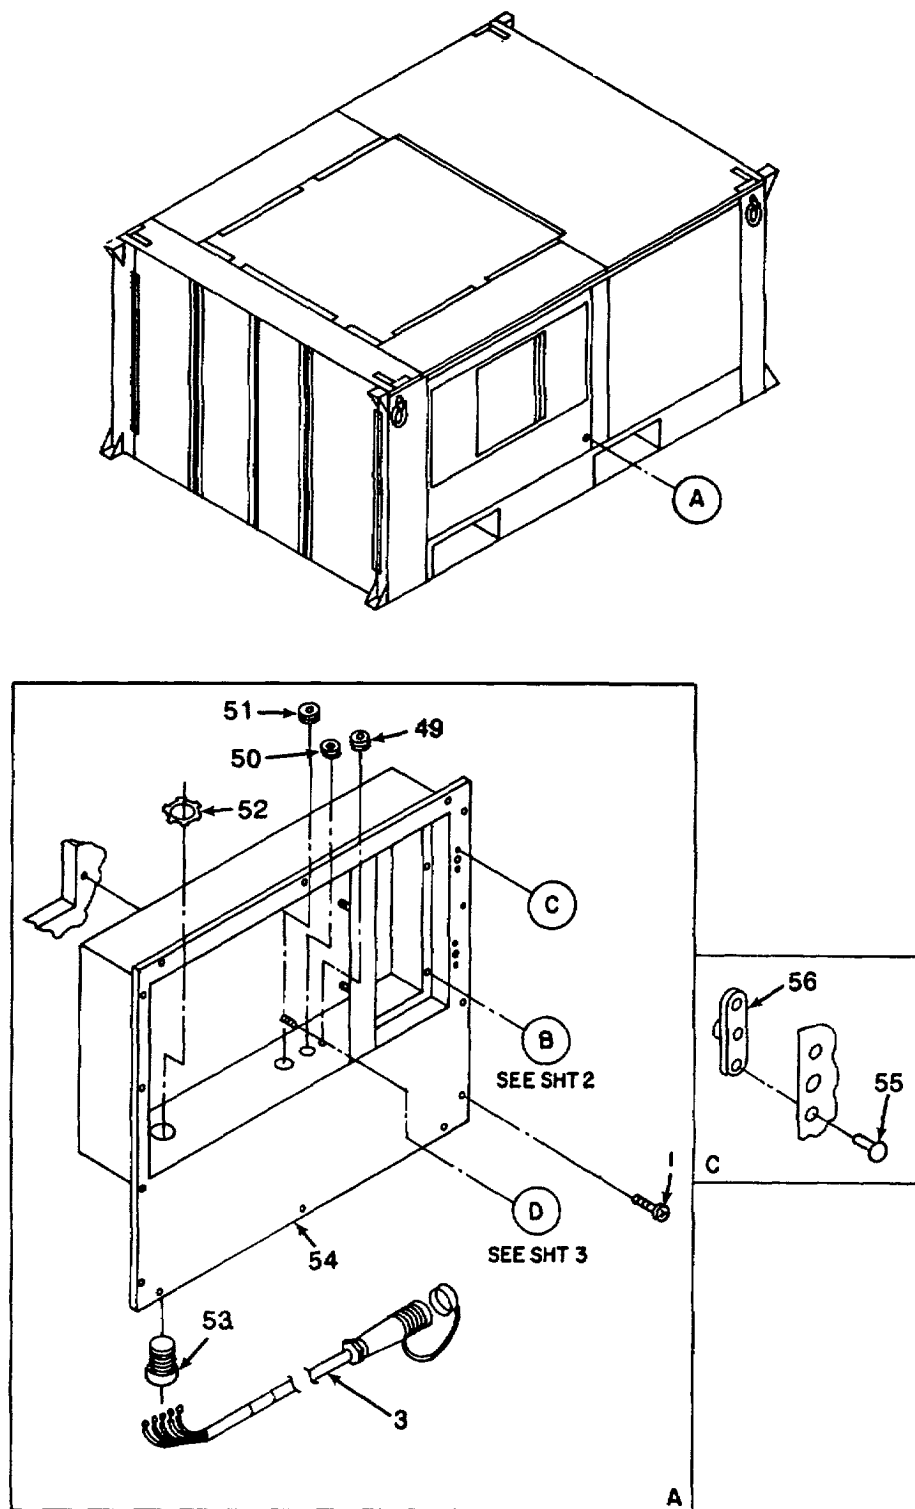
External Control Panel and Internal Control Board (Sheet 1 of 3)
